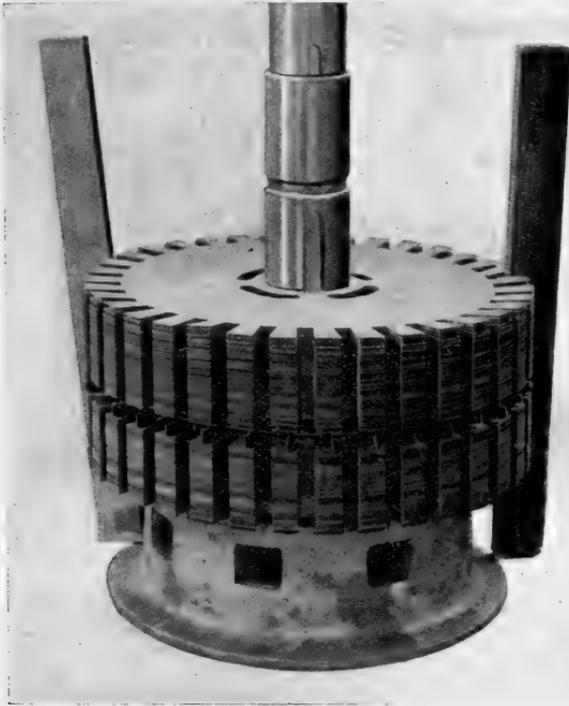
Assembling a Standard 15 h.p. Core. Vickers, Sons & Maxim.
